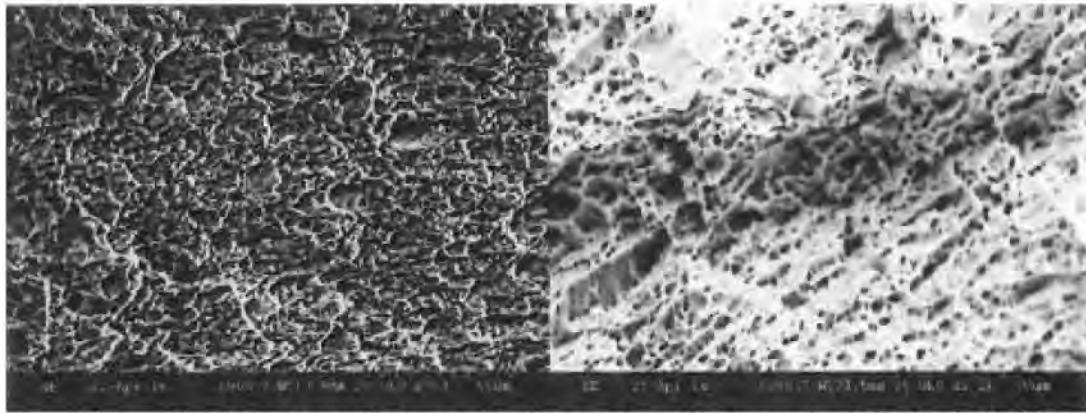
Examples of SEM image of fracture surface from samples cut from ruptured tank showing ductile failure.
